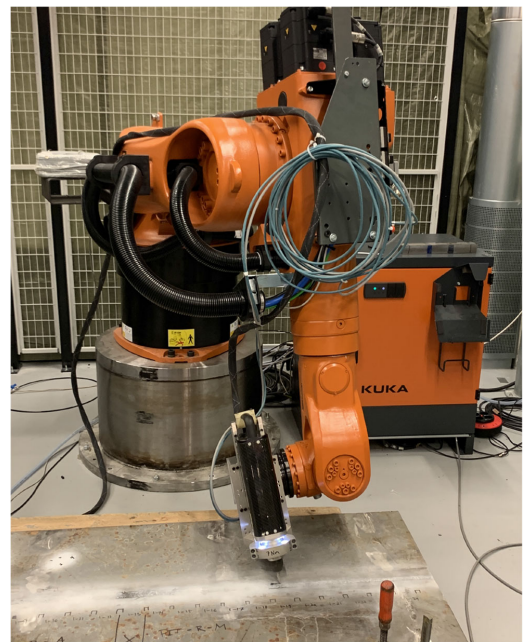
Performing robotised HFMI treatment of the welded sample
